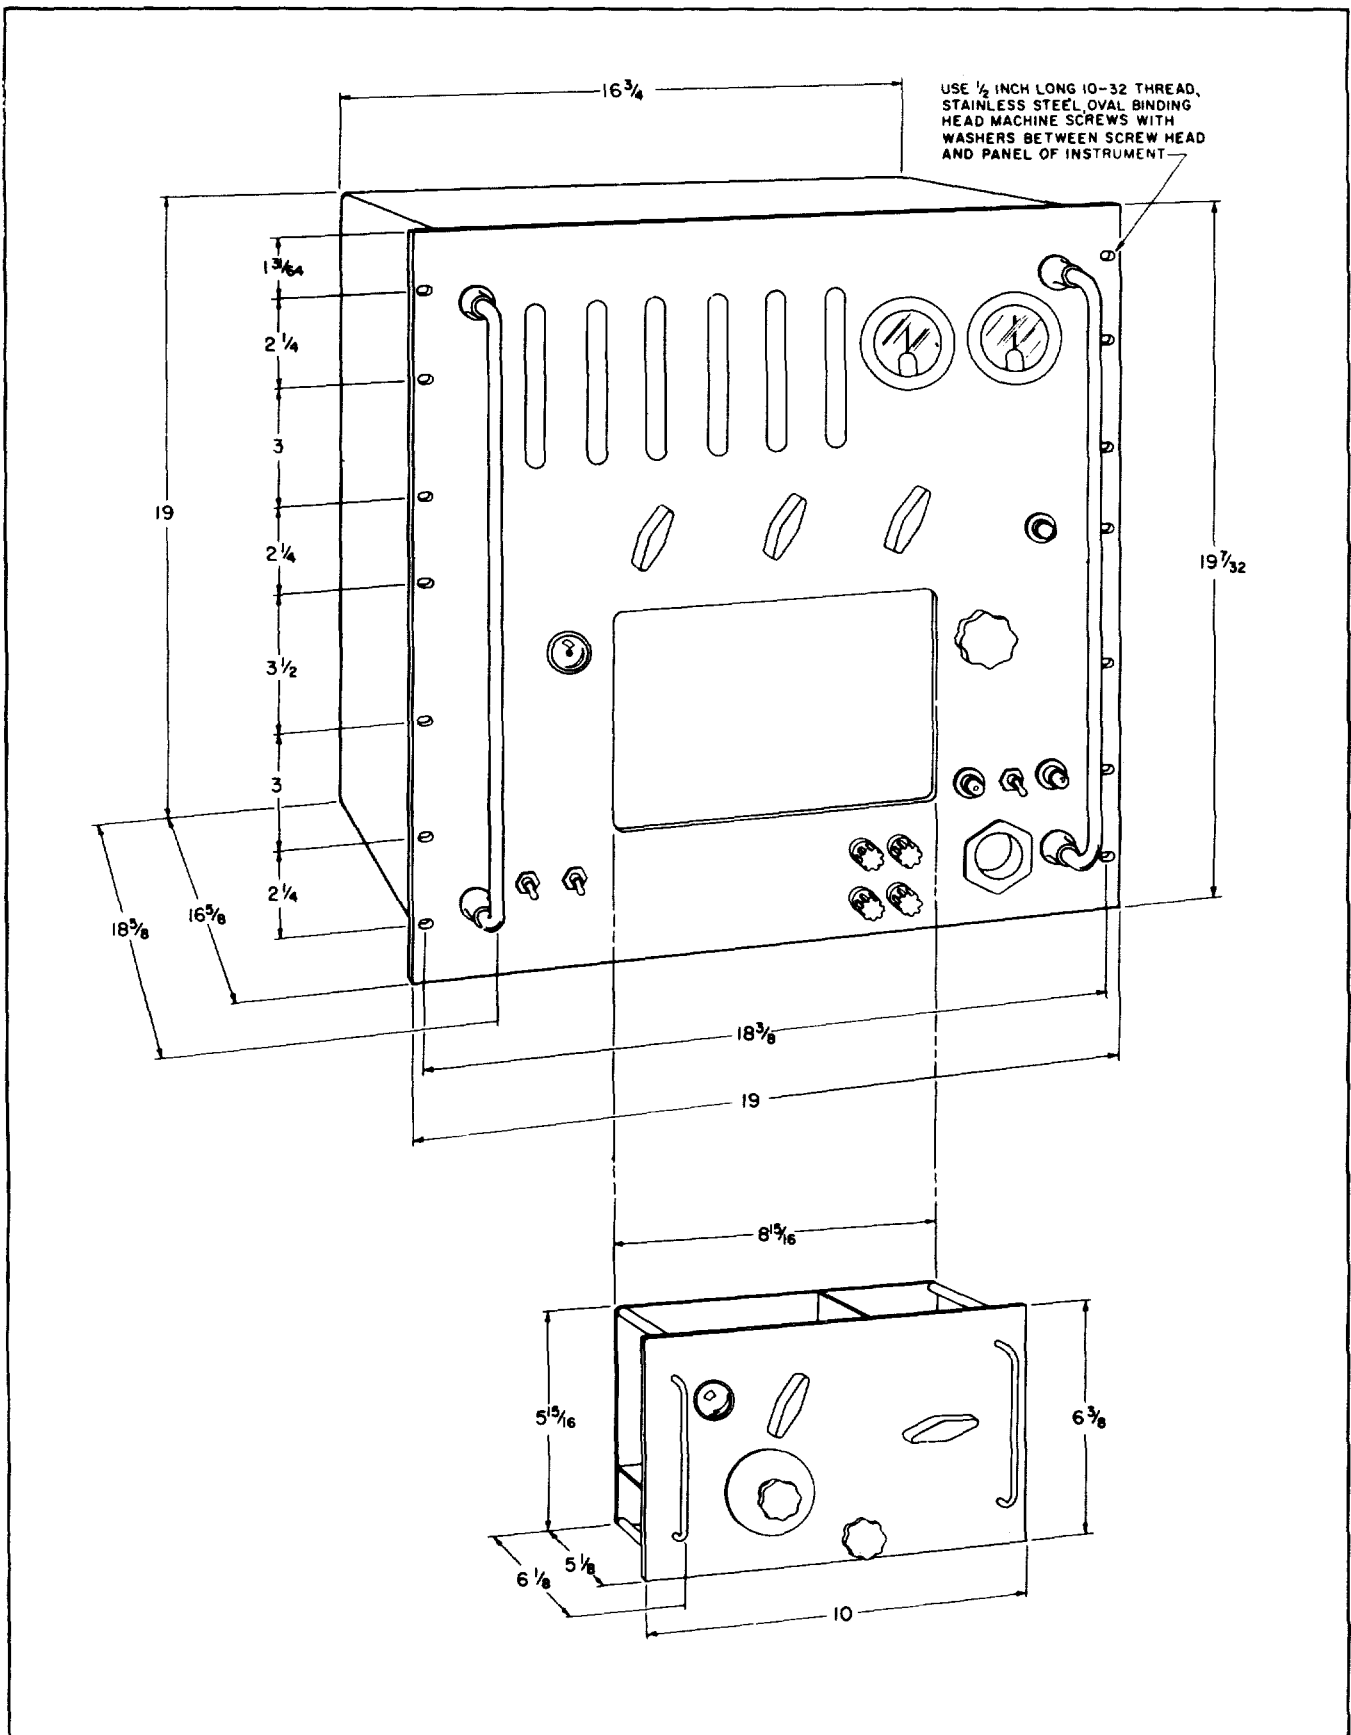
Dimensions of Frequency Meter FR-38/U and Plug-in Unit
